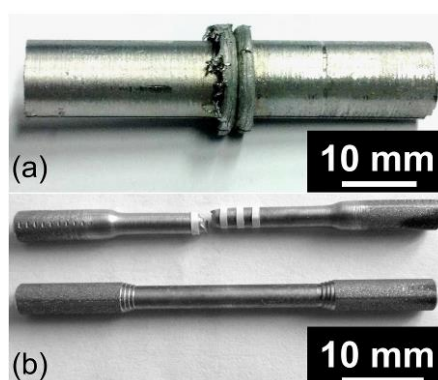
(a) Typical image of a friction welded Al–12Si joint with symmetrical and smooth flash at the joint. (b) Examples of tensile specimens machined from the welded samples.
